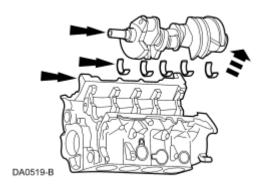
Removing Crankshaft, Upper Crankshaft Main Bearings And Upper Thrust Washers From Cylinder Block
